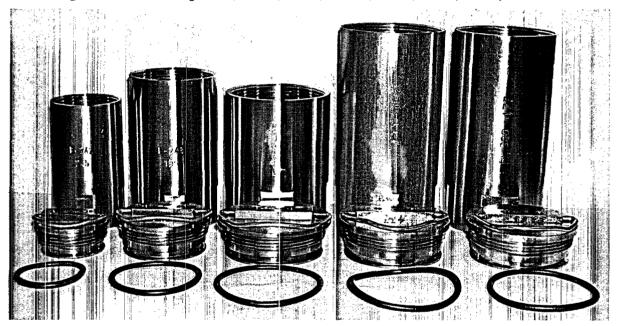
Inserts Disassembled (L to R): F-242, F-248, F-256, F-250, F-320
